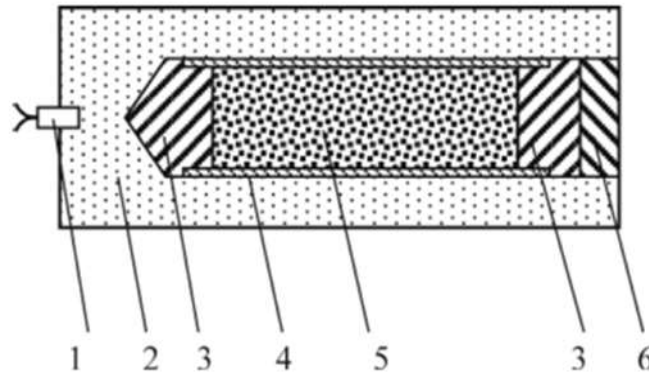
Direct method; 1-detonator, 2-explosive charge, 3-steel plugs, 4-container, 5-copper powder, 6-momentum trap
